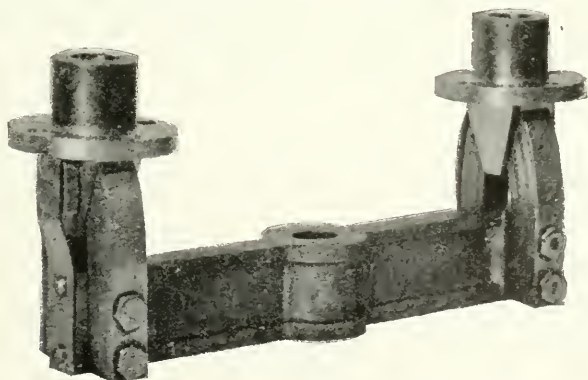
DETAILS OF CONTACT SHOWN IN FIG. 9
